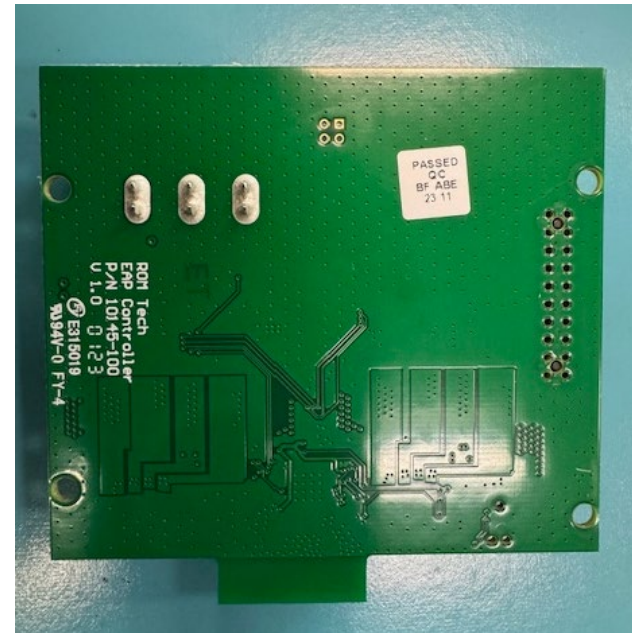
; Bottom side EAP Controller Board, 10145-200 Rev 2
